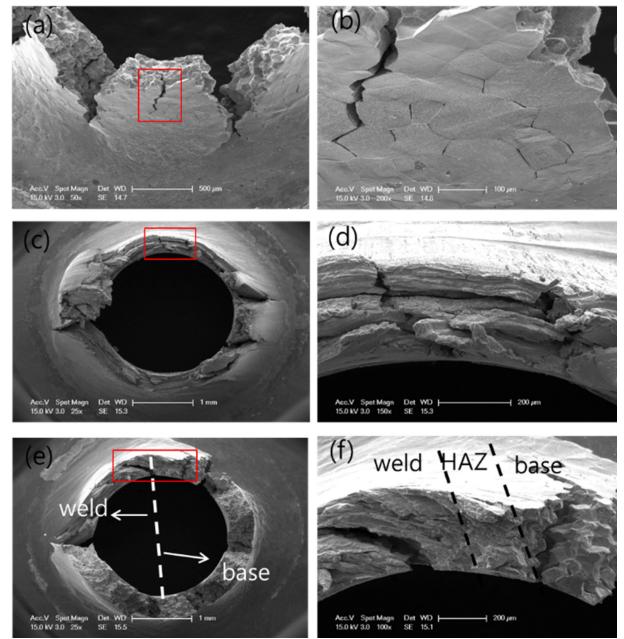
Bottom fracture surface of SP creep rupture specimen (a) Base metal (c) Weld metal (e) HAZ at 392 N (T = 700°C)
